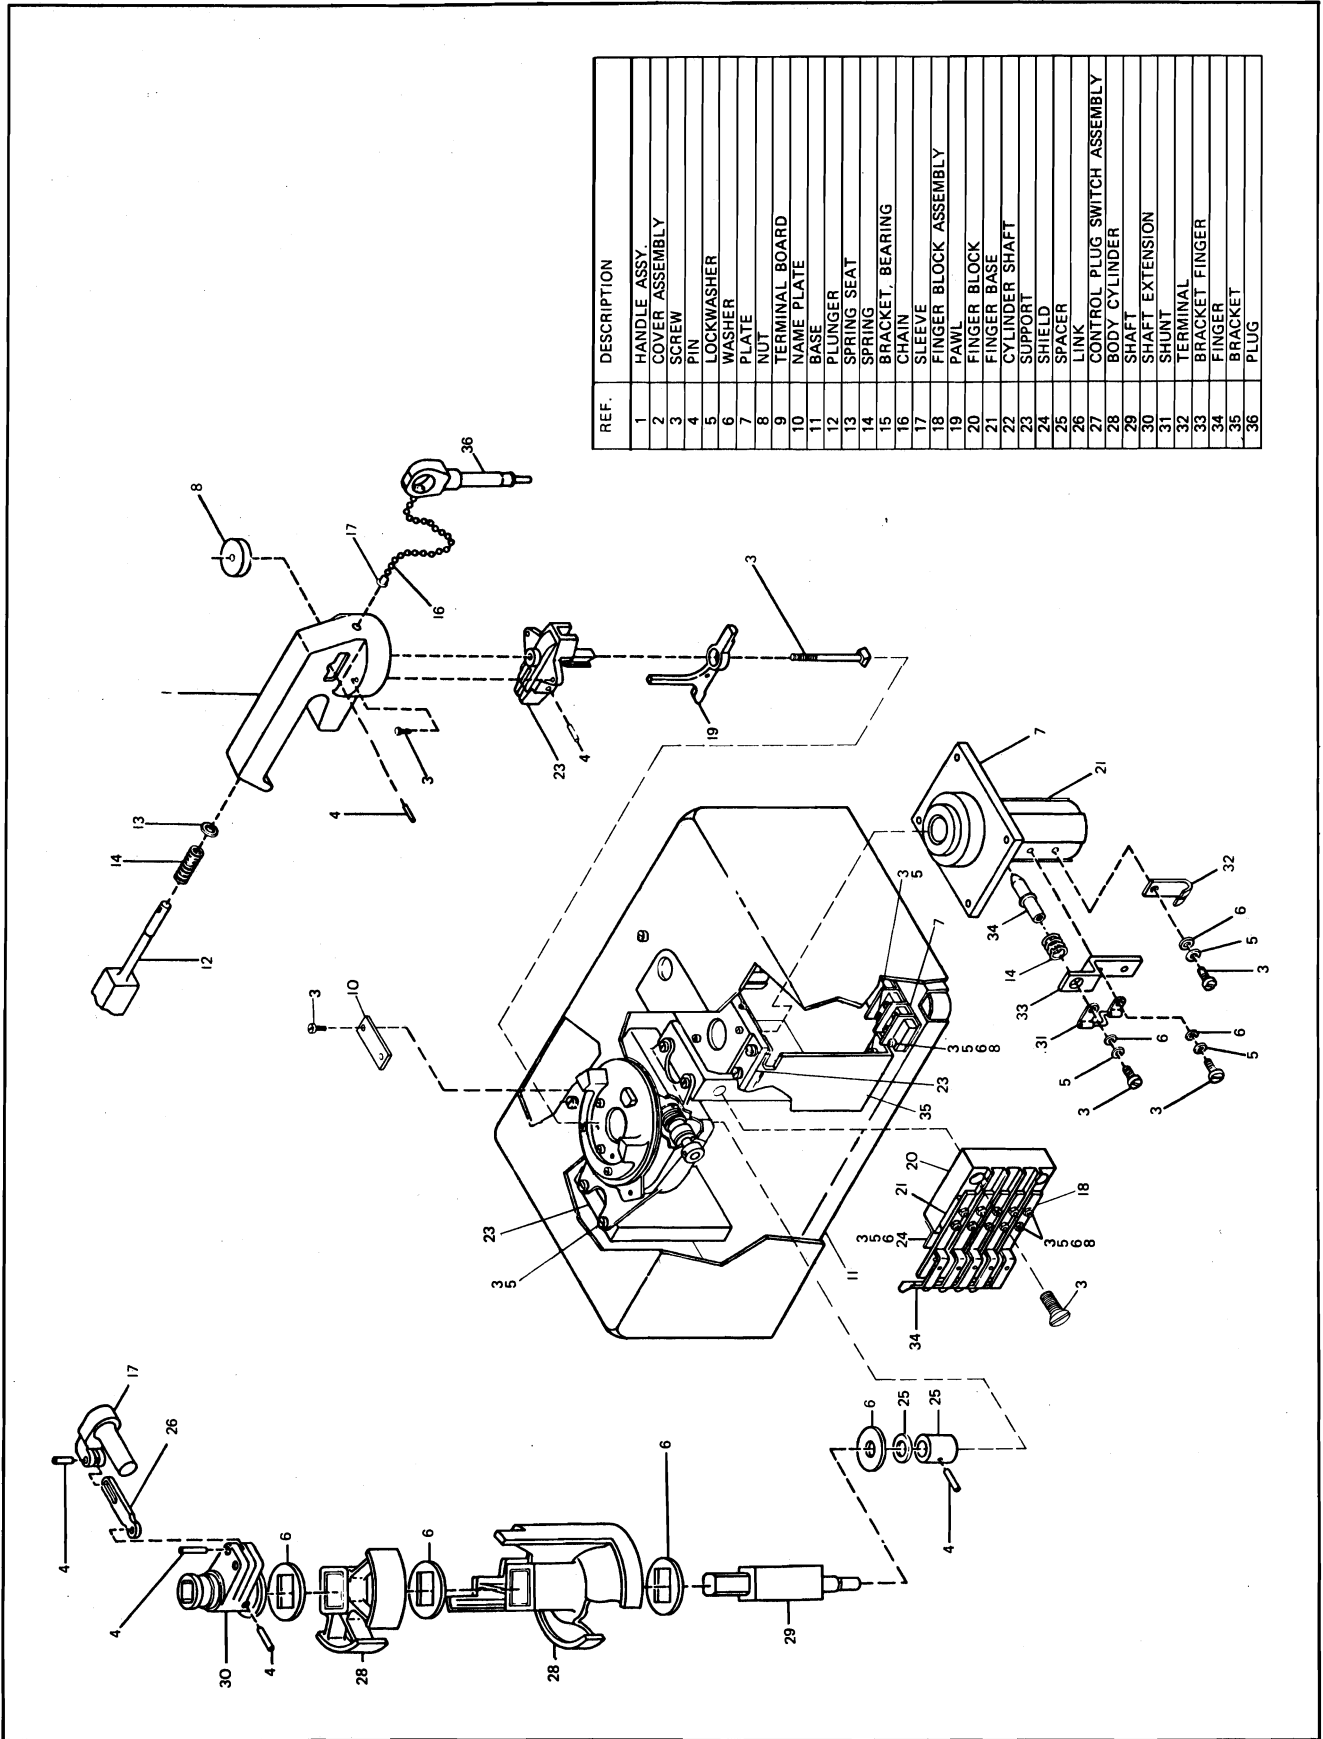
EXPLODED VIEW CONTROLLER 17KC7D2. E-19934
